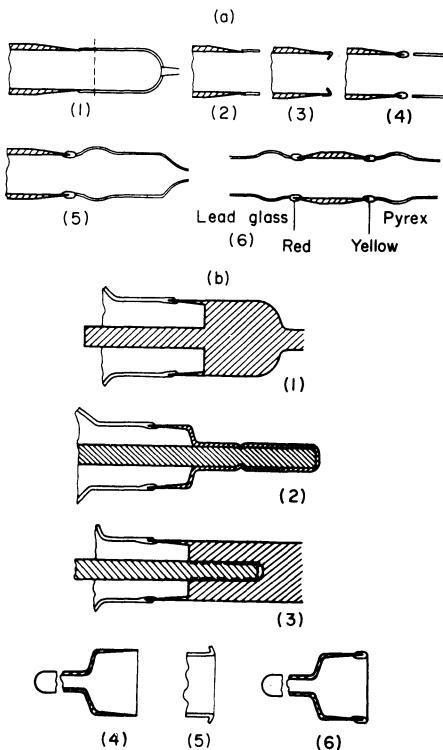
Operations in completing a tubular Housekeeper seal
